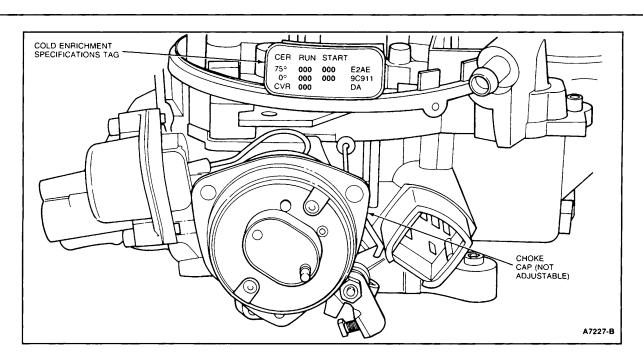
Cold Enrichment Rod (CER) Adjustment Sequence
